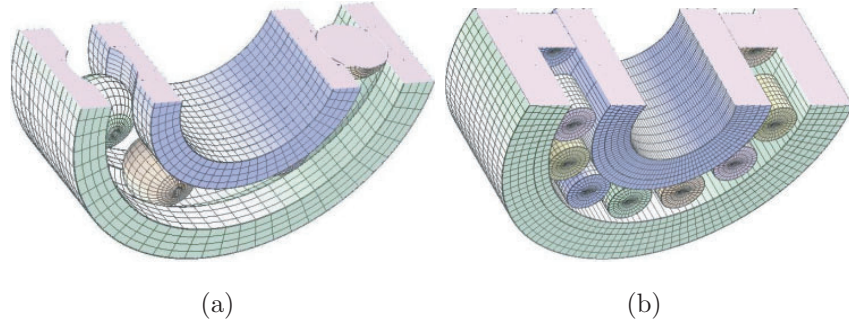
Cut-away finite element mesh of the radial ball bearing used in the gearbox (dimensions detailed in Table 2) and a double-row cylindrical rolling element bearing (from a helicopter application).
